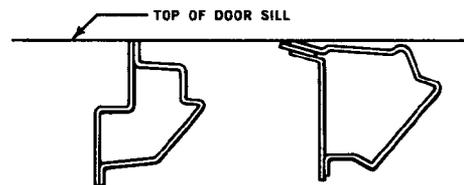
TYPICAL CROSS SECTIONS OF ROCKER PANELS
